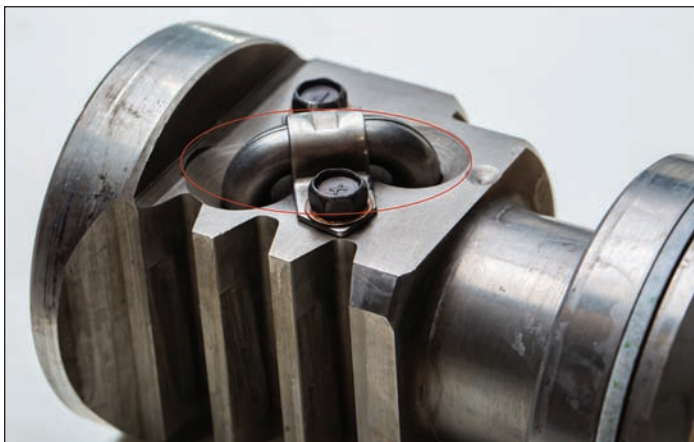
The ball bearings "stay in the piston" while it moves back and forth along the ball screw by passing through the recirculation tube (circled).
